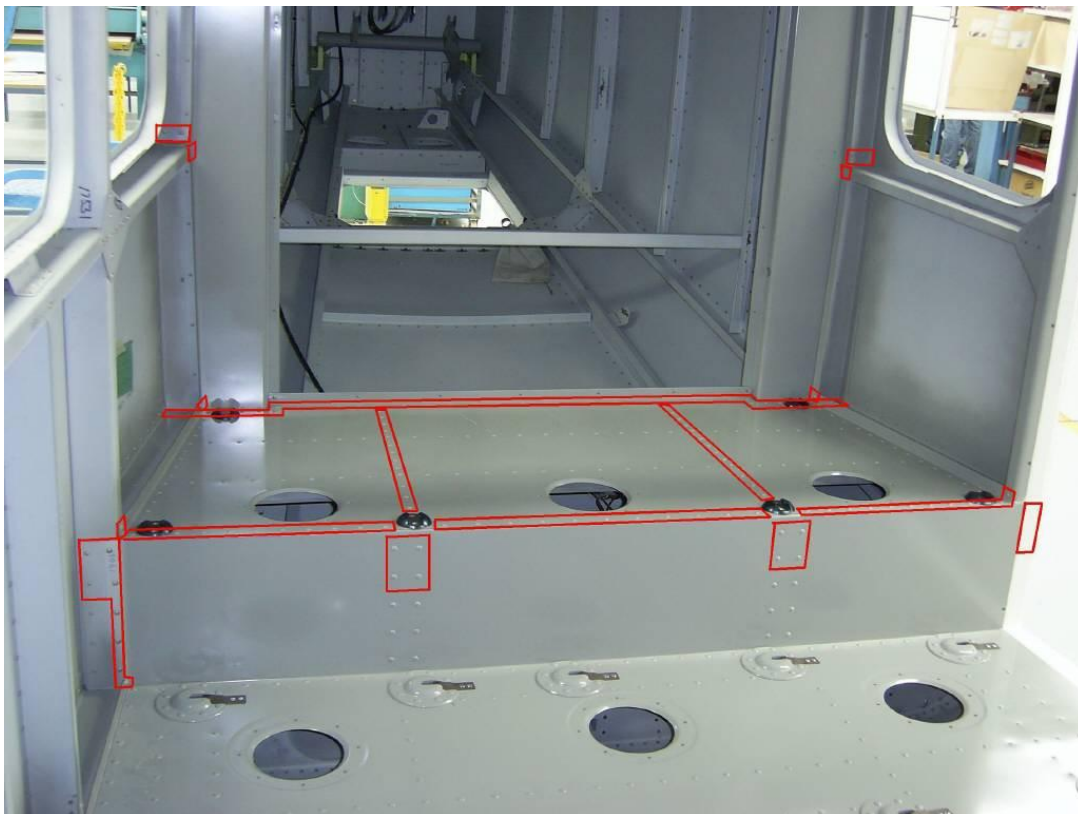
Remove rivets to remove Baggage shelf Floor area as per picture. Remove trim angle from forward face of Baggage shelf step starboard side (lower left of Pic).
